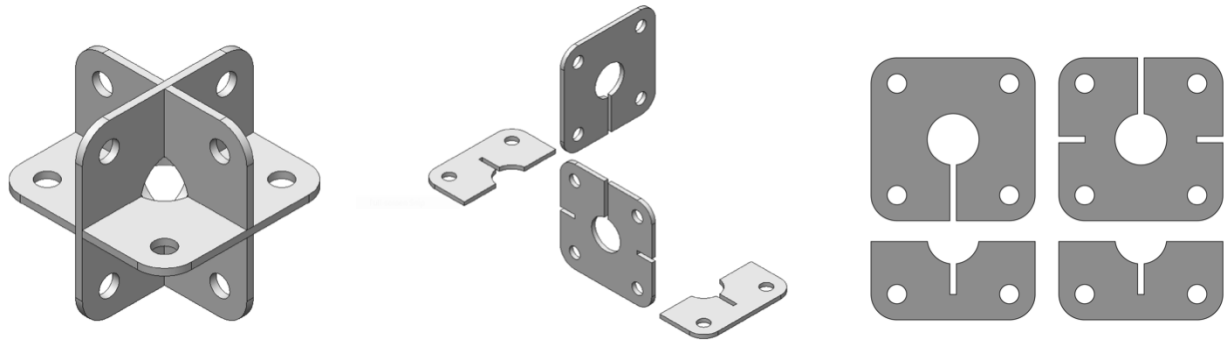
Octet Joint (L – R). Plates assembled, Exploded View, and Flat Pattern.
